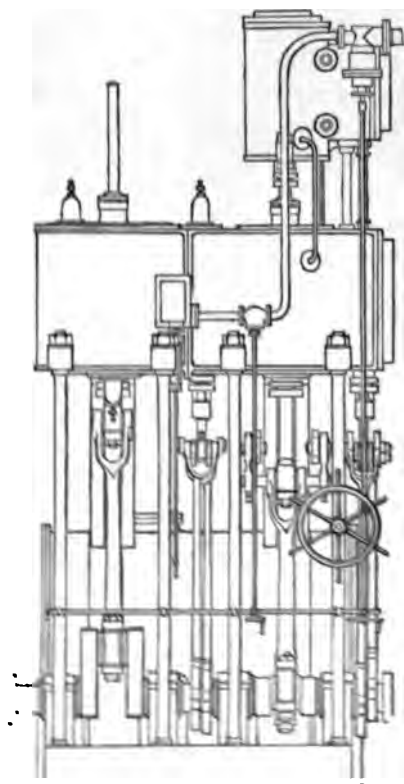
Vertical Steam Engine. The condenser is of the Siemens type, and the engine is of the Siemens type.
